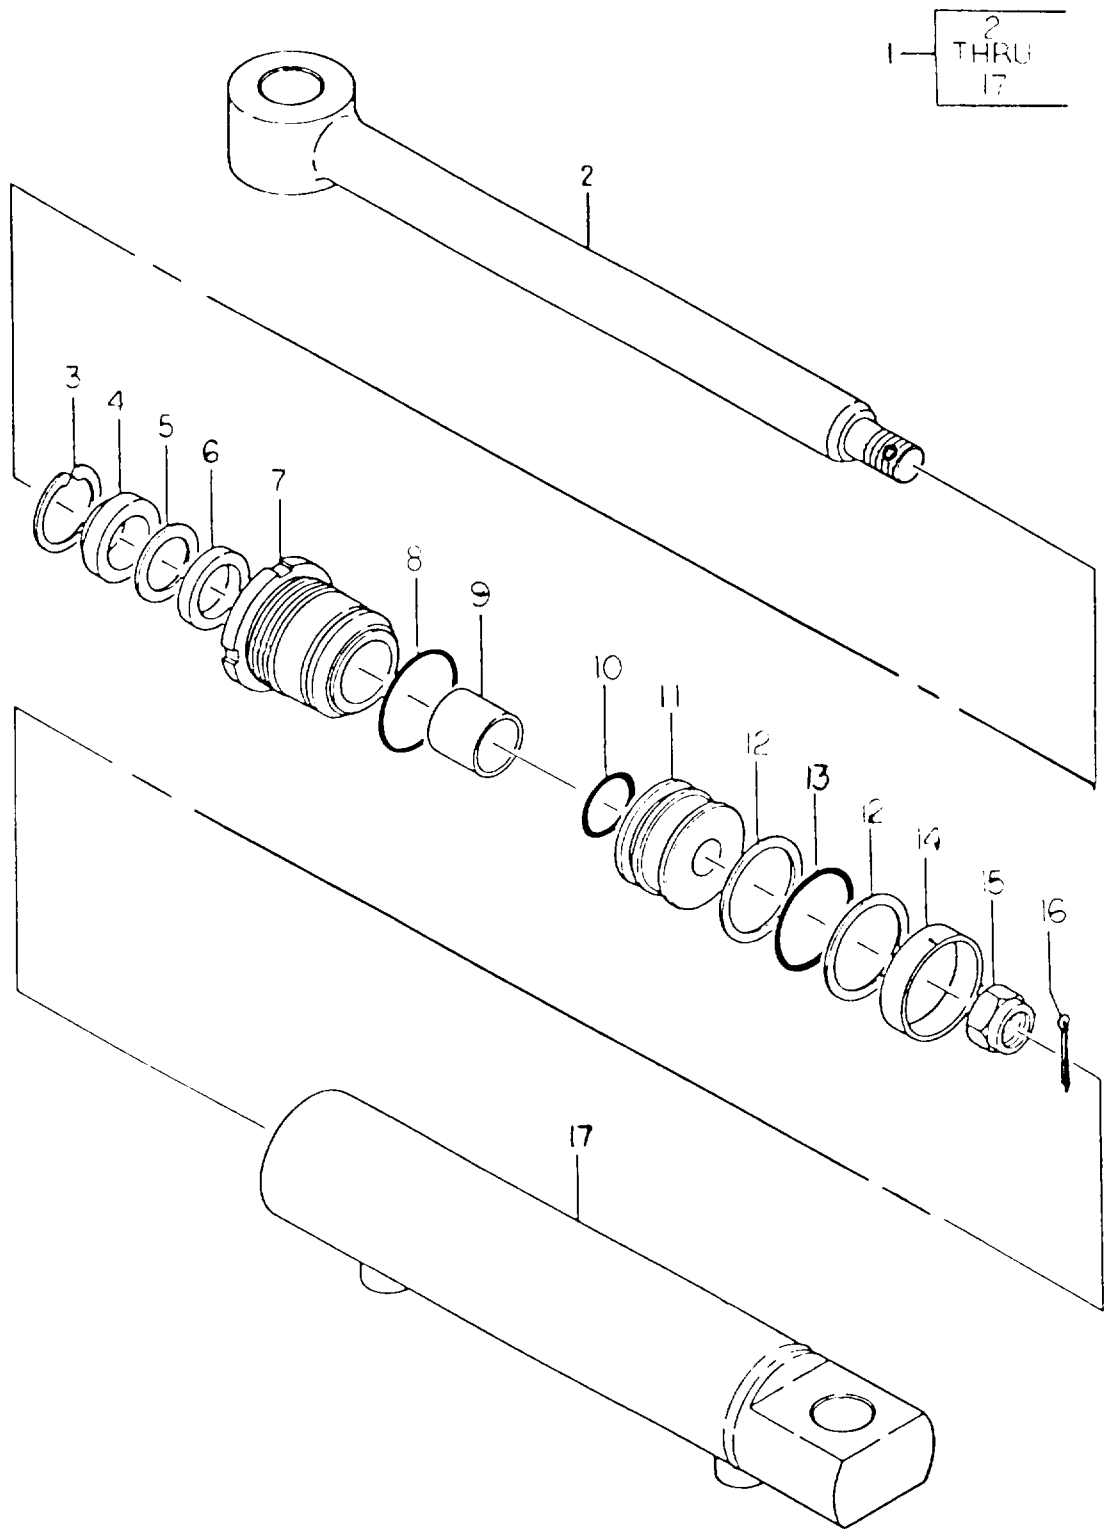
SIDE SHIFTER & FORK ASSEMBLY
